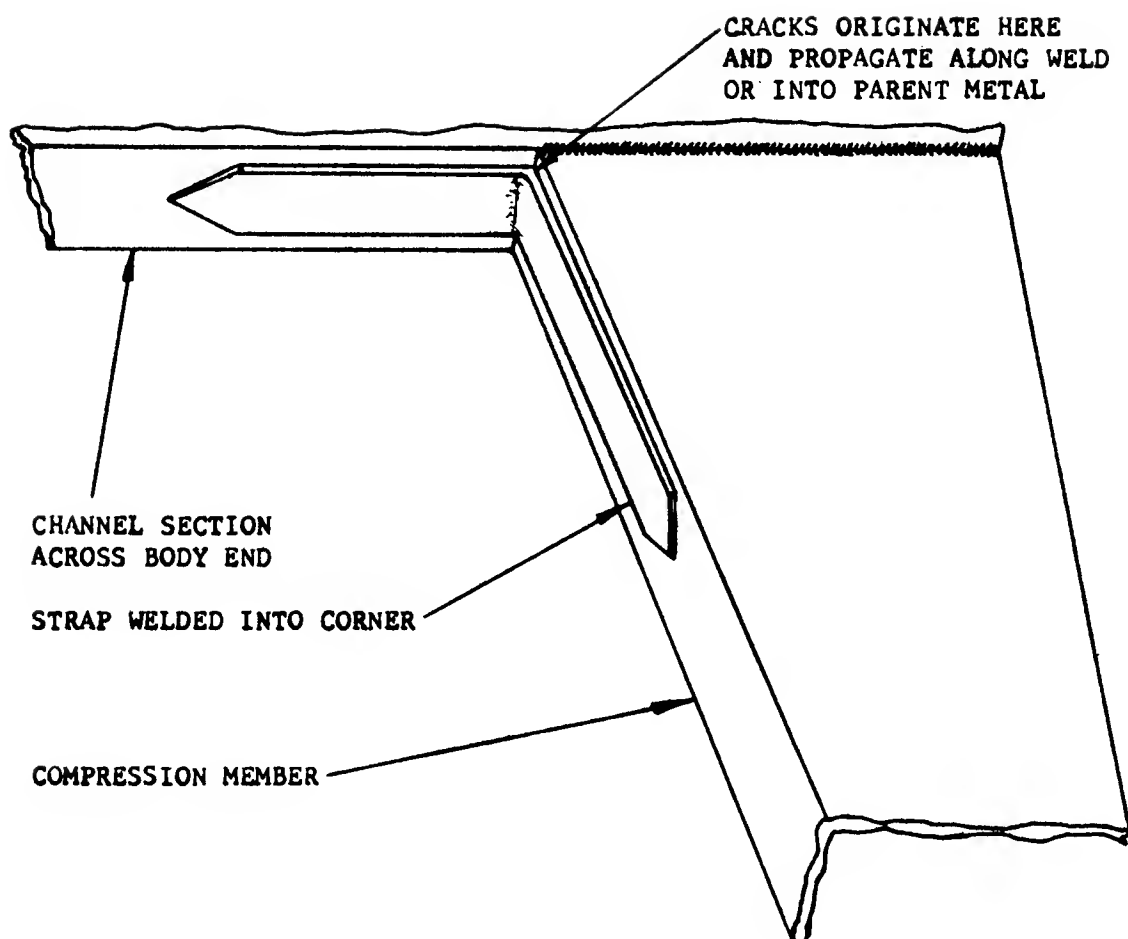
Sketch of Body End with Strap in Corner But No Gusset.
